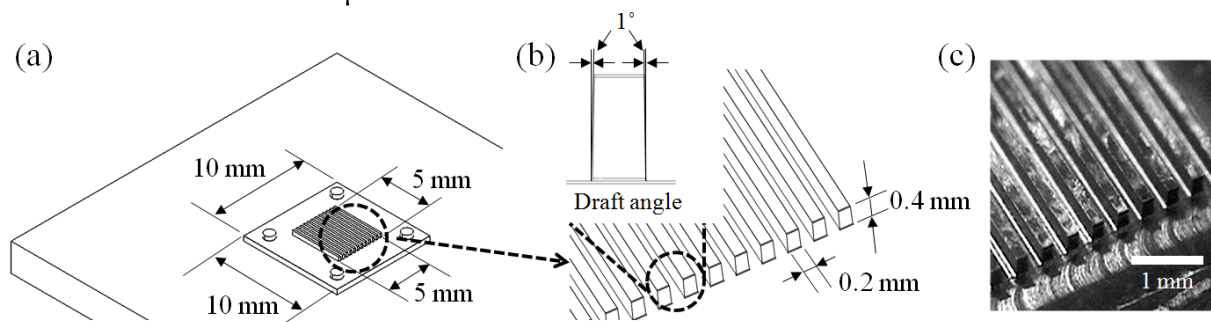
A schematic diagram of designed micro mold for hot embossing process and micro machined micro mold
